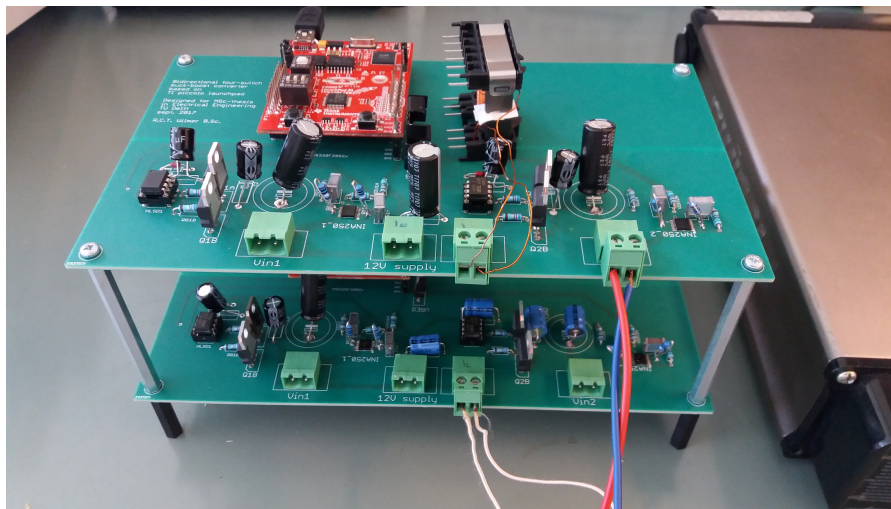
Both PCB boards mounted together. A microcontroller, inductor and the battery are visible.
